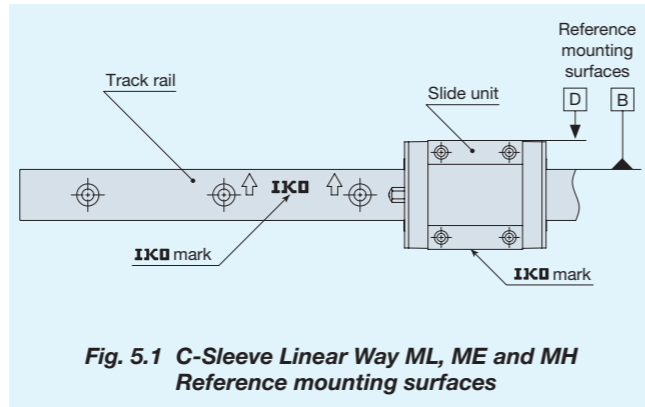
C-Sleeve Linear Way ML, ME and MH Reference mounting surfaces
